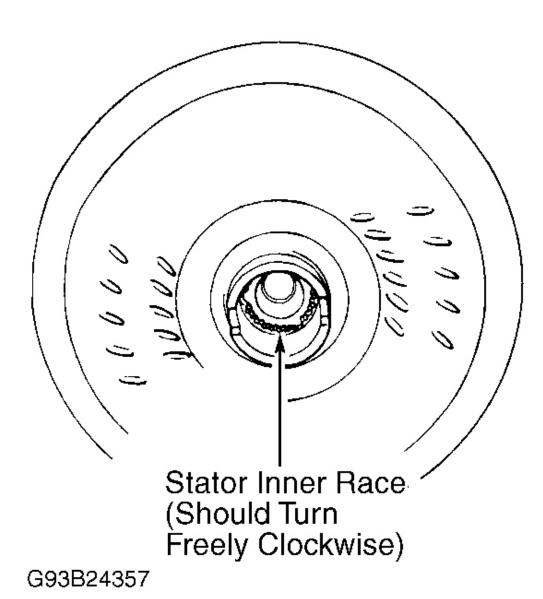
Checking Stator Roller Clutch Courtesy of SUZUKI OF AMERICA CORP.
